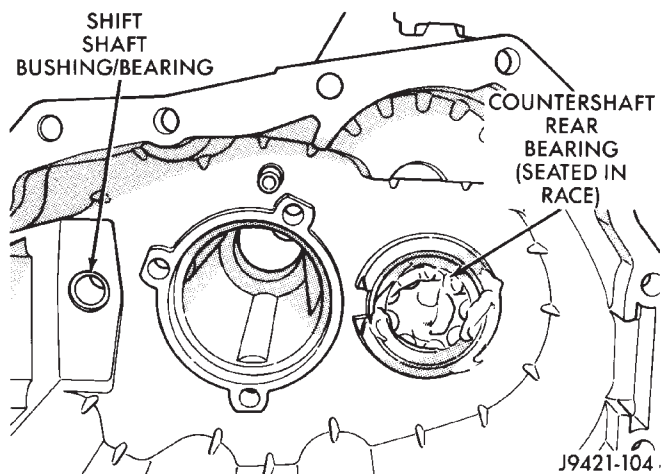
Countershaft Rear Bearing Seated In Seated in Race
